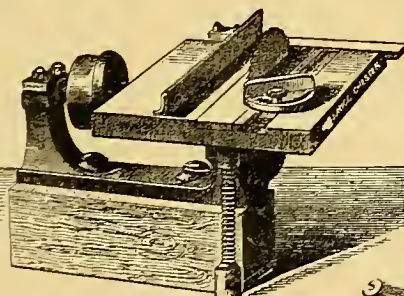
SMALL COMBINED SAWING AND MOULDING MACHINE.
